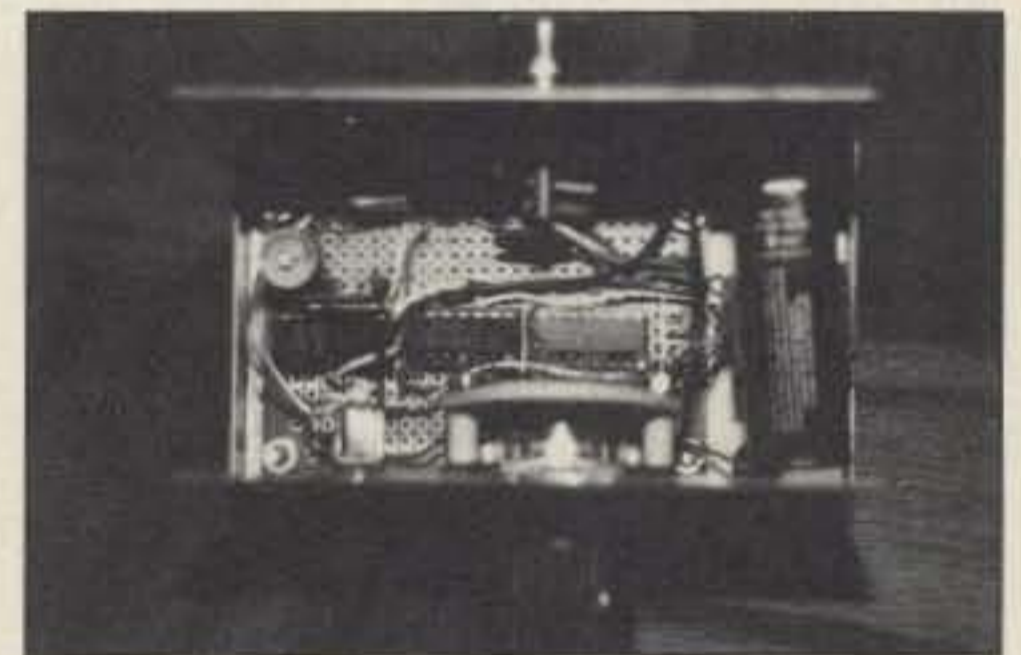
Photo B. The components are mounted on a Radio Shack multi-purpose board (276-150) and wired breadboard style.
